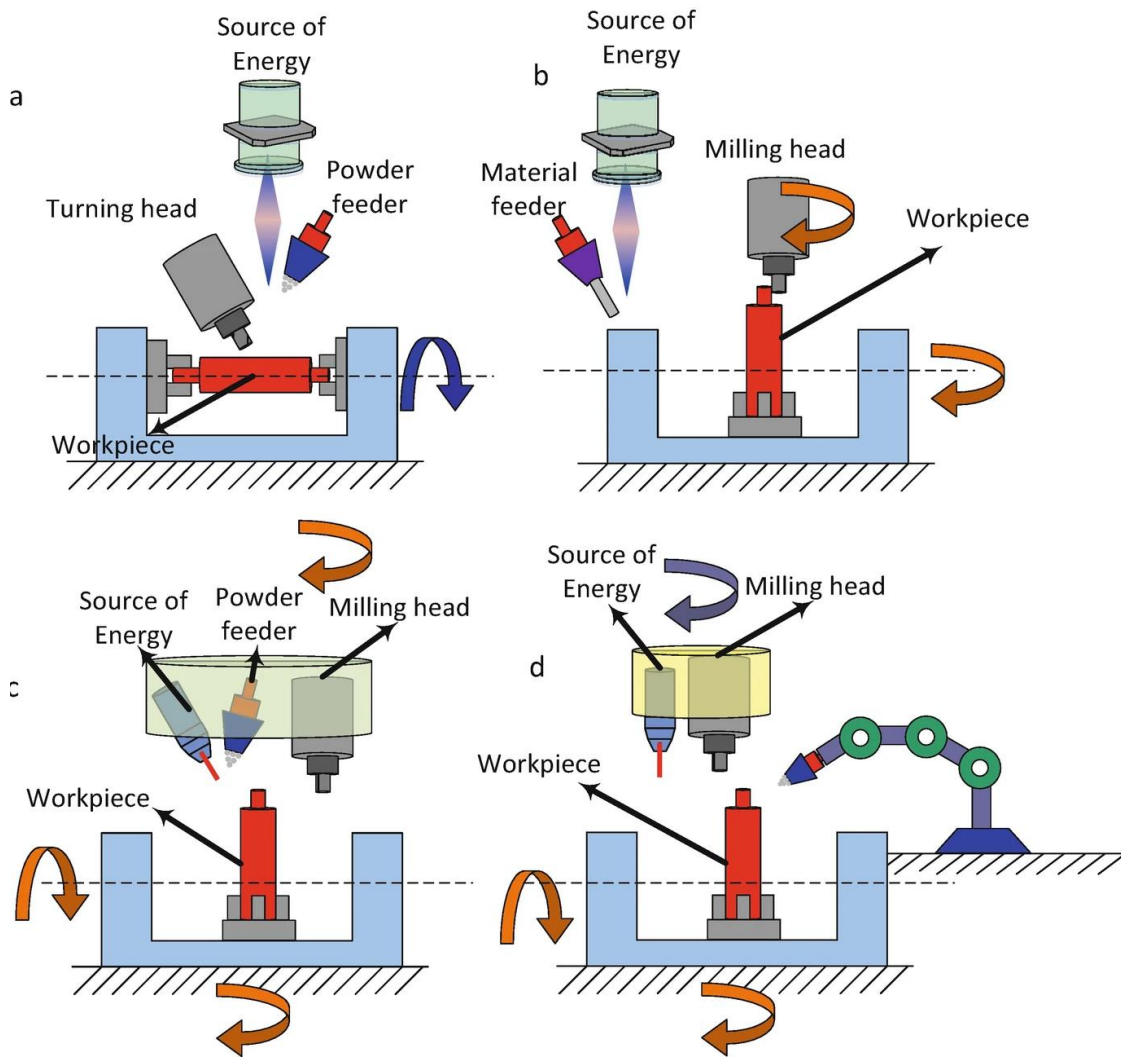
Hybrid DED setup a) Turing work hold with a separate turning head and printhead system b) Milling work hold with a separate milling head and printhead system c) integrated milling and printhead with multi-axis milling capabilities d) milling and laser integration with a separate powder feeding mechanism.[110]
